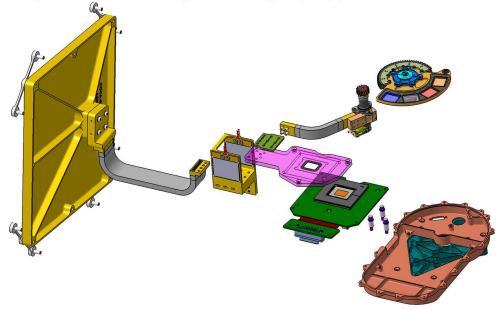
Assembly of the focal plane array assembly: FPA PCB (green), thermal hardware (yellow and violet) and housing (red)
